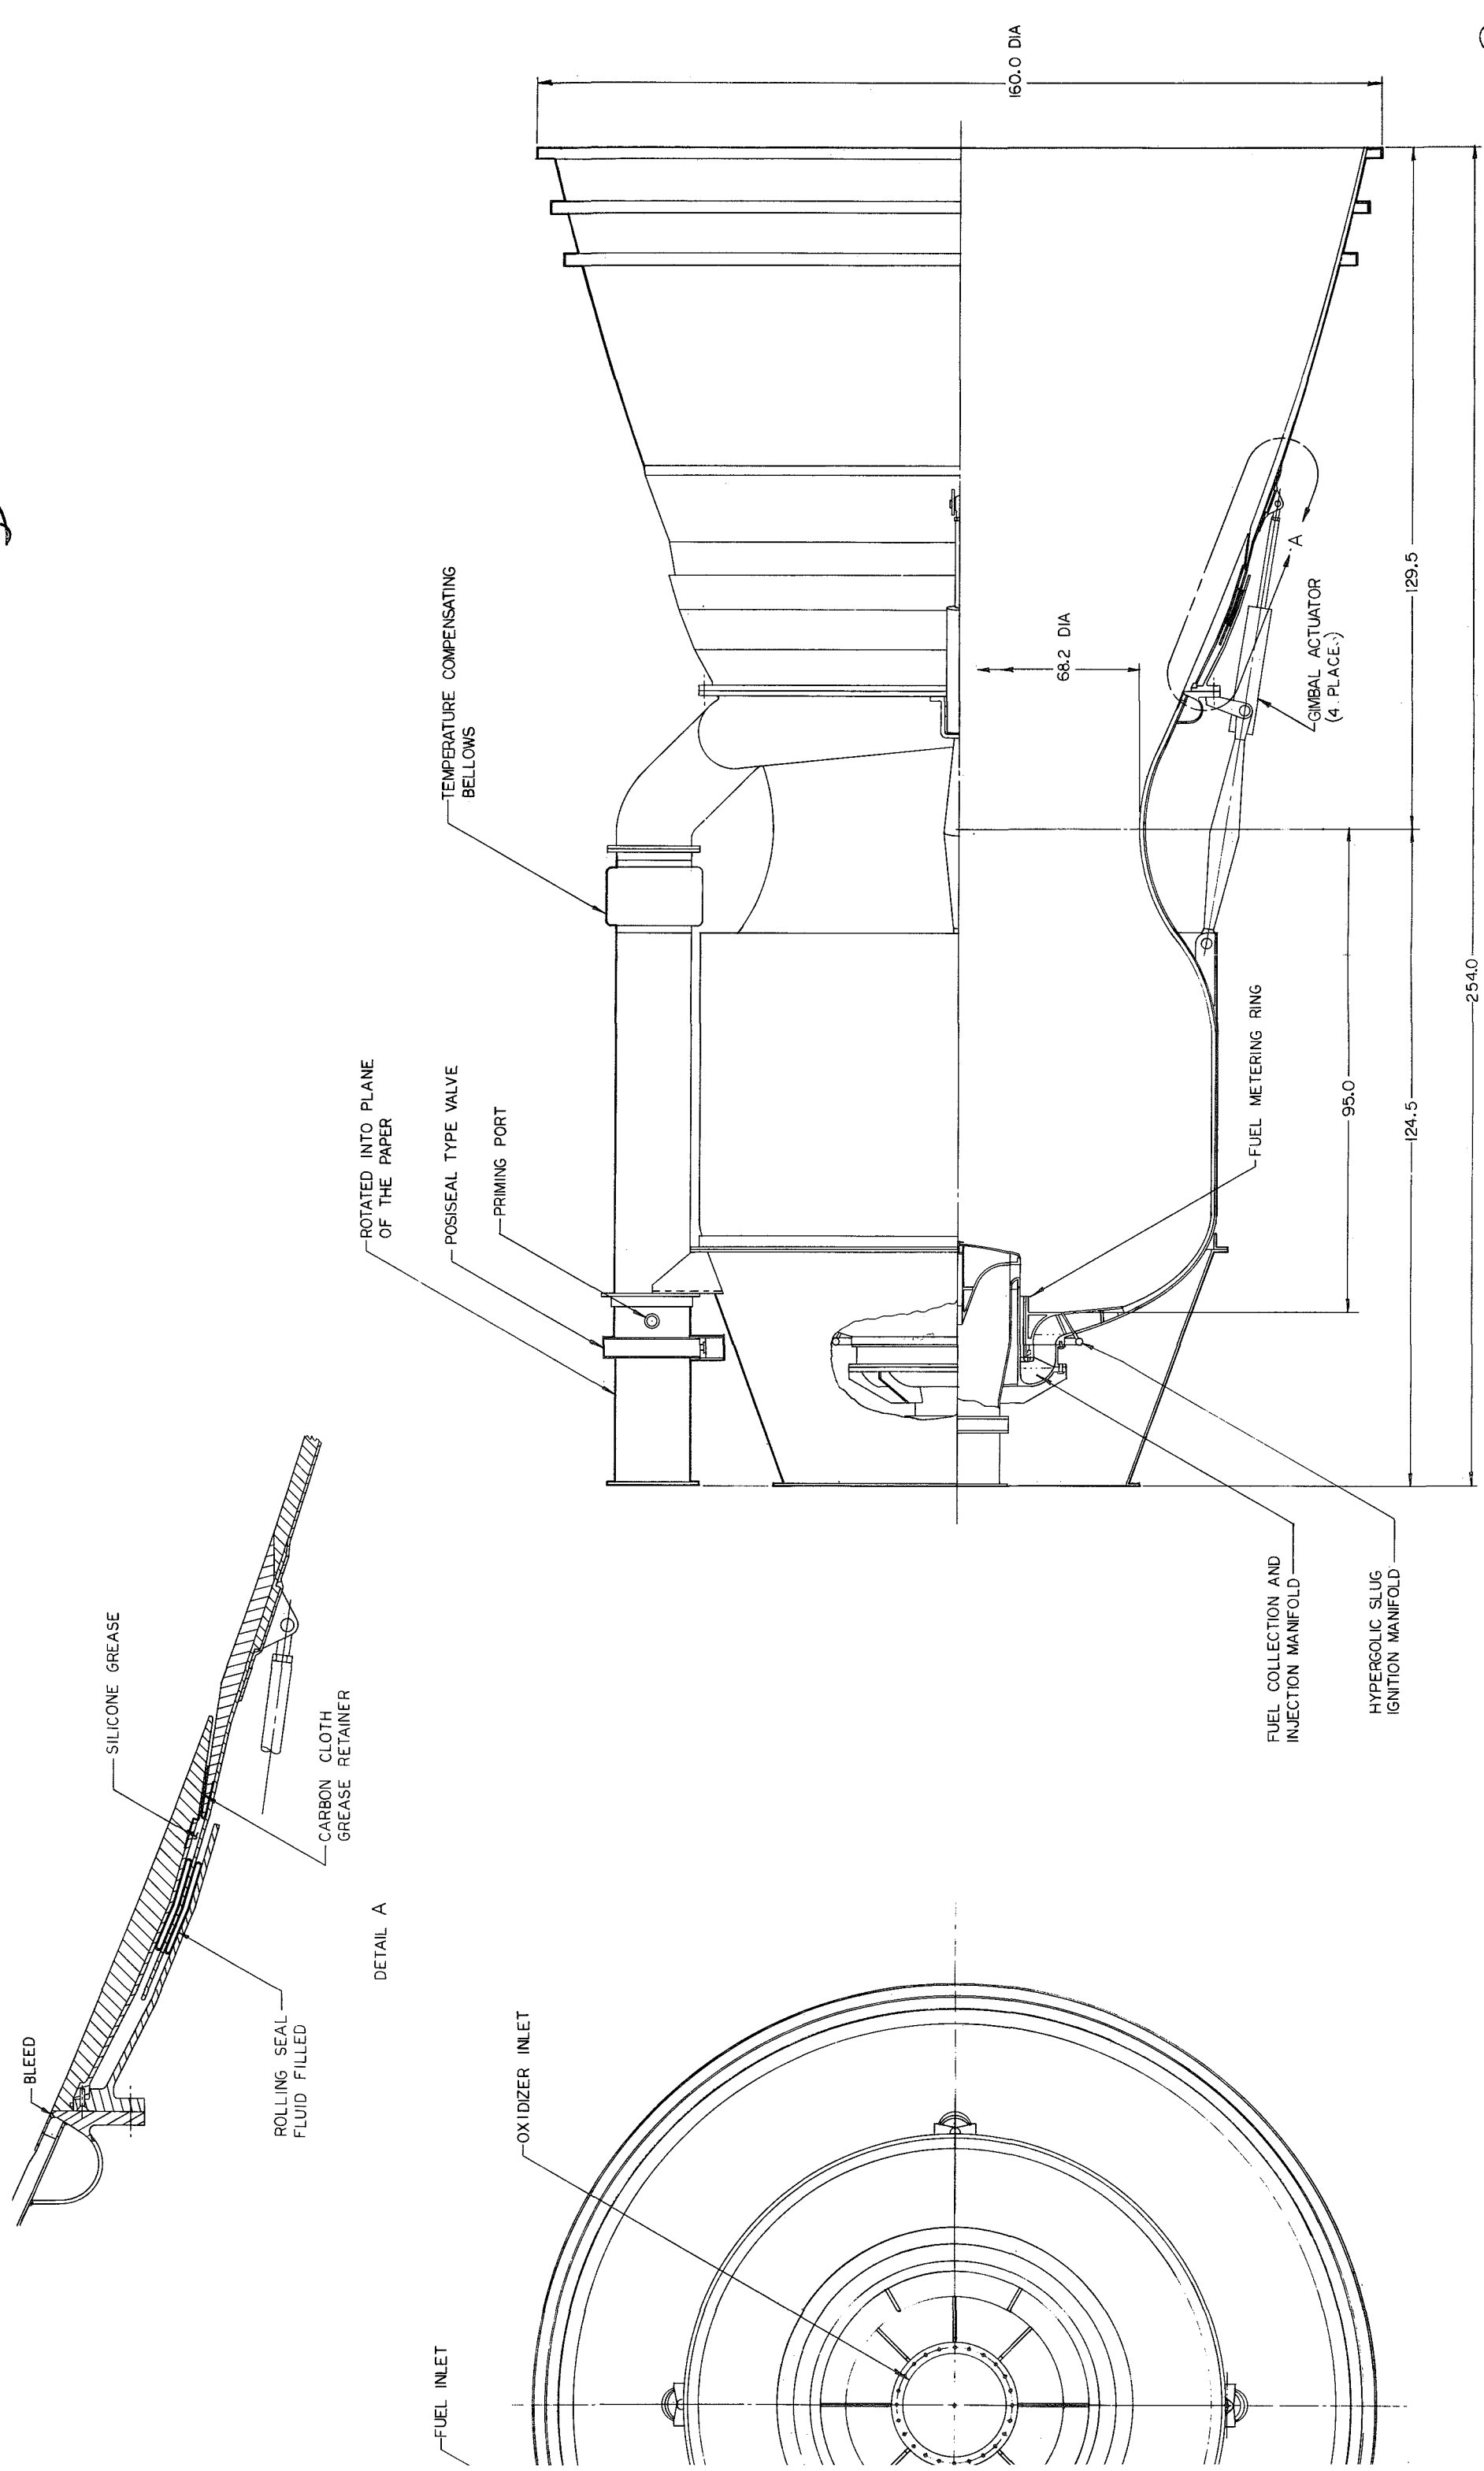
Swivel Nozzle with Techroll® Fluid Bearing
